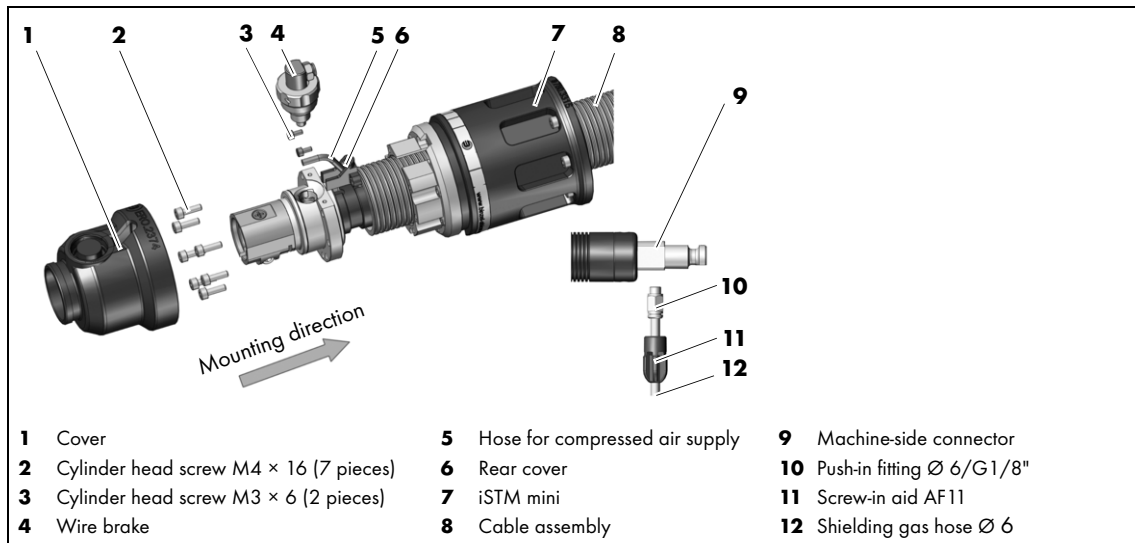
Mounting the cable assembly iSTM mini for ABIROB® G with wire brake
